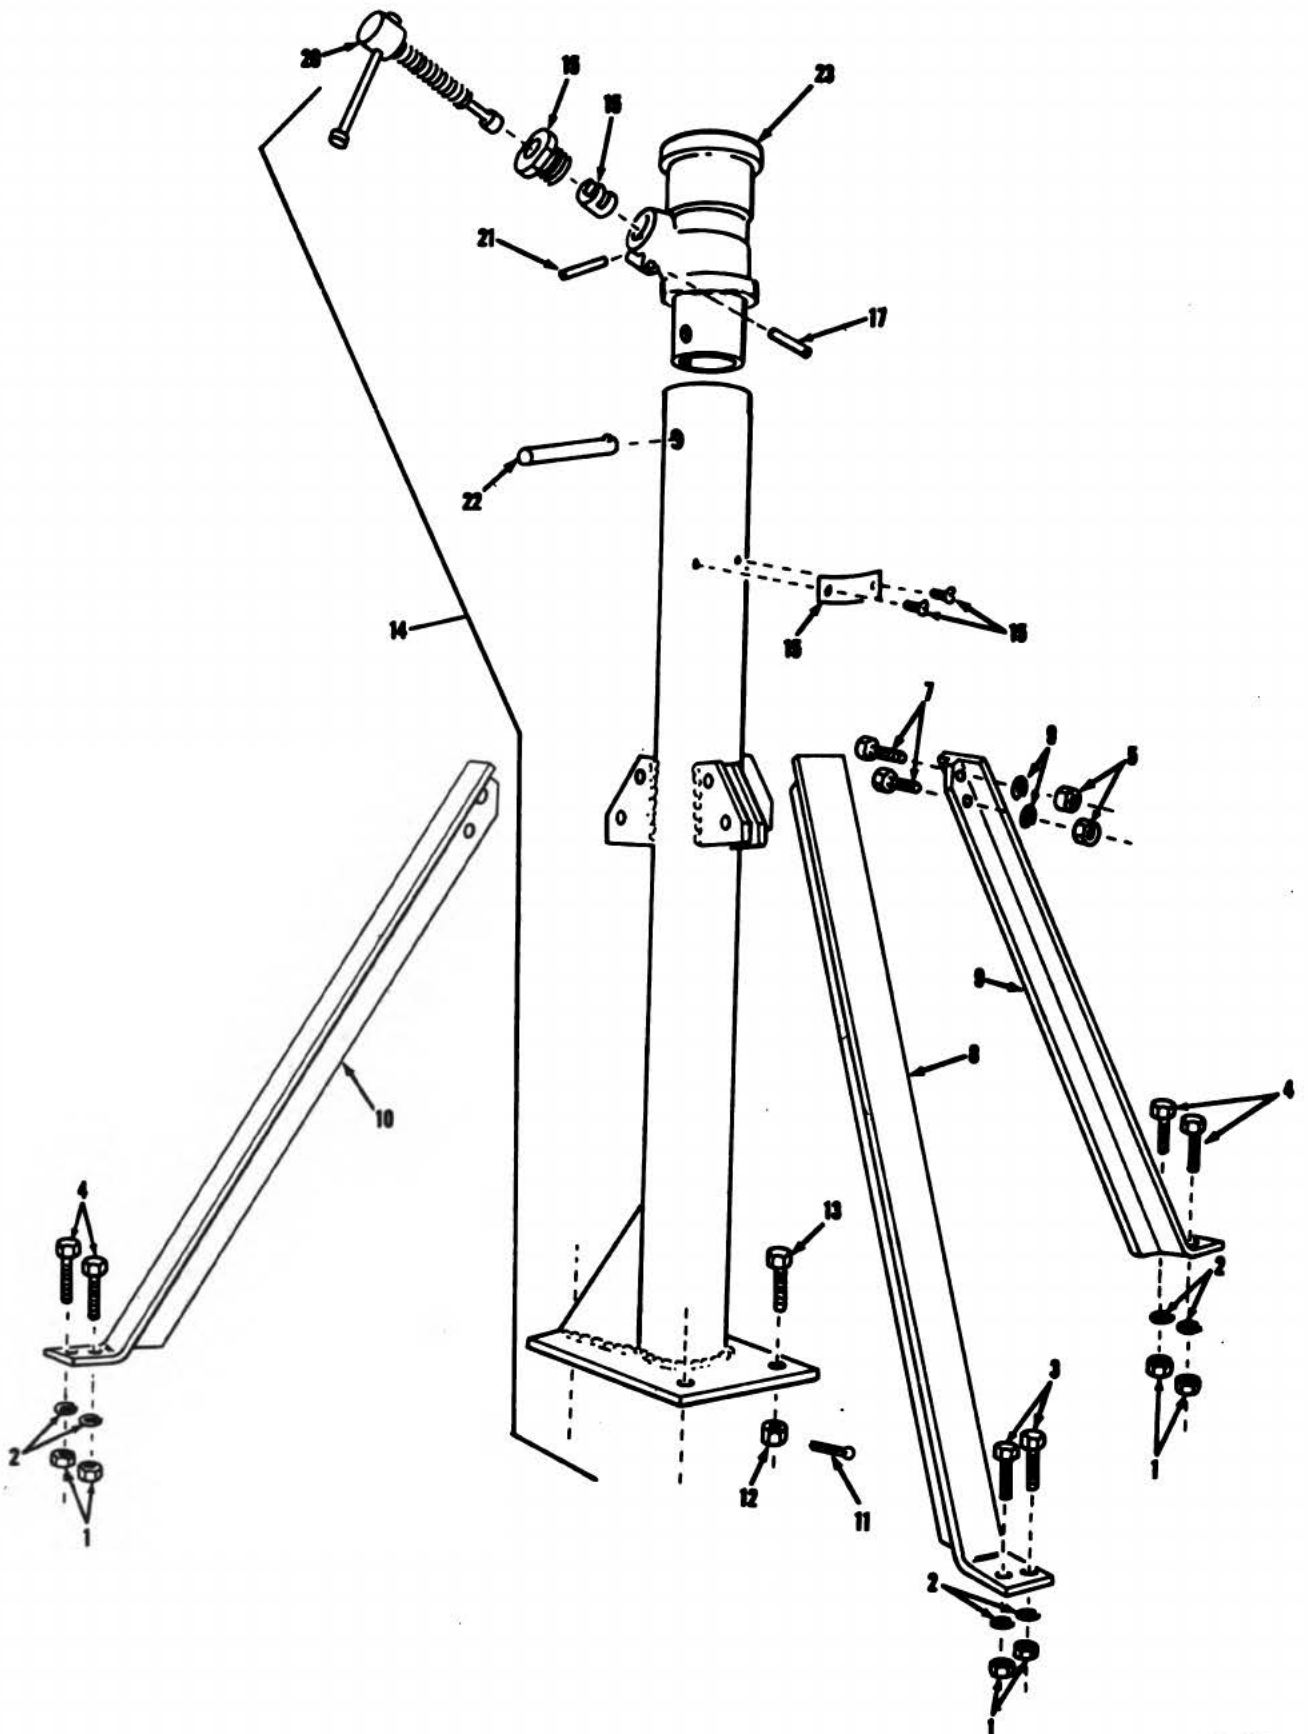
Pedestal, gun mount, MS1C-7069767—exploded view.
